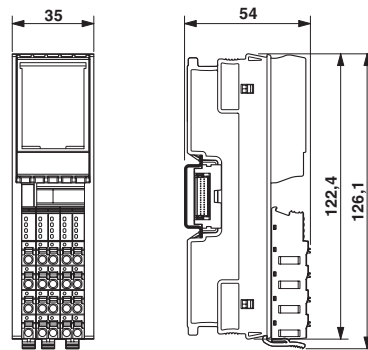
Nominal dimensions of F half housing with one terminal block
